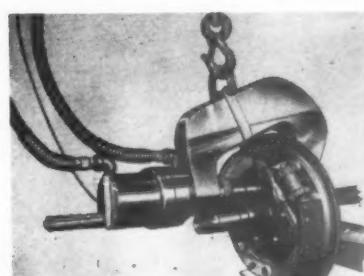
Another application for portable riveters is shown by the 35-ton model, setting cold rivets in the backing plate to rear axle truck housing assembly.
